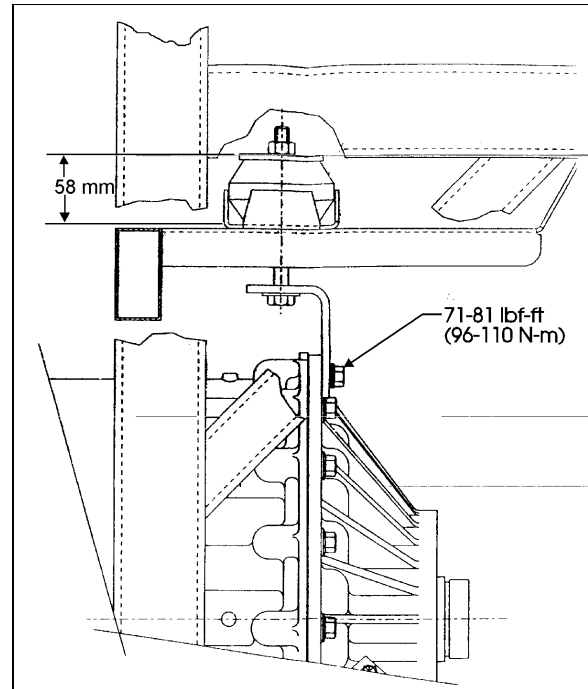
RUBBER DAMPER TOLERANCE 07014
